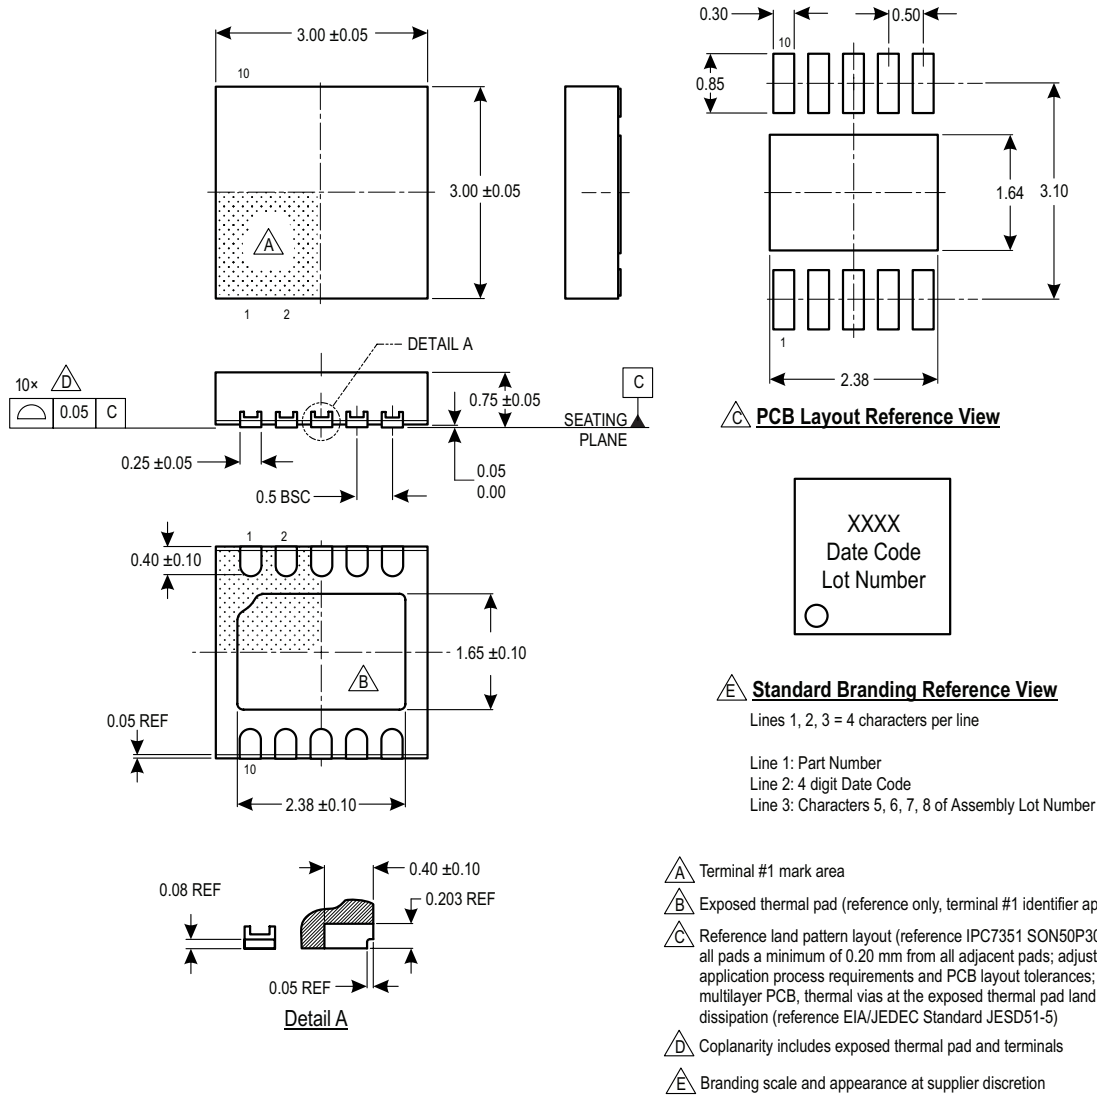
Package EJ, Wettable Flank DFN-10 with Exposed Thermal Pad
